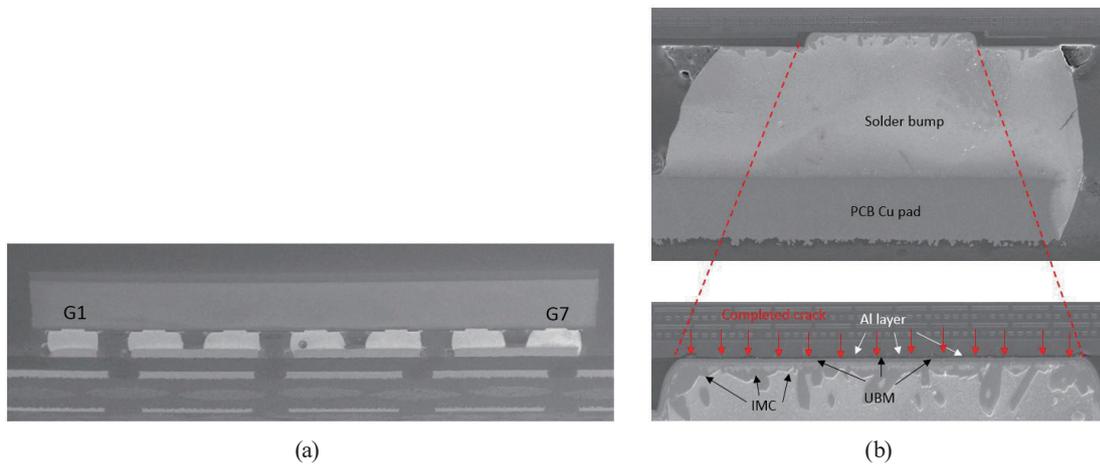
(Color online) Lot 2, SAC405 + 3.5% Bi. SEM inspection after cross section: (a) the side view of package, and (b) the completed crack in the aluminum layer of the G7 ball, where the cracked area is shown using red arrows.
